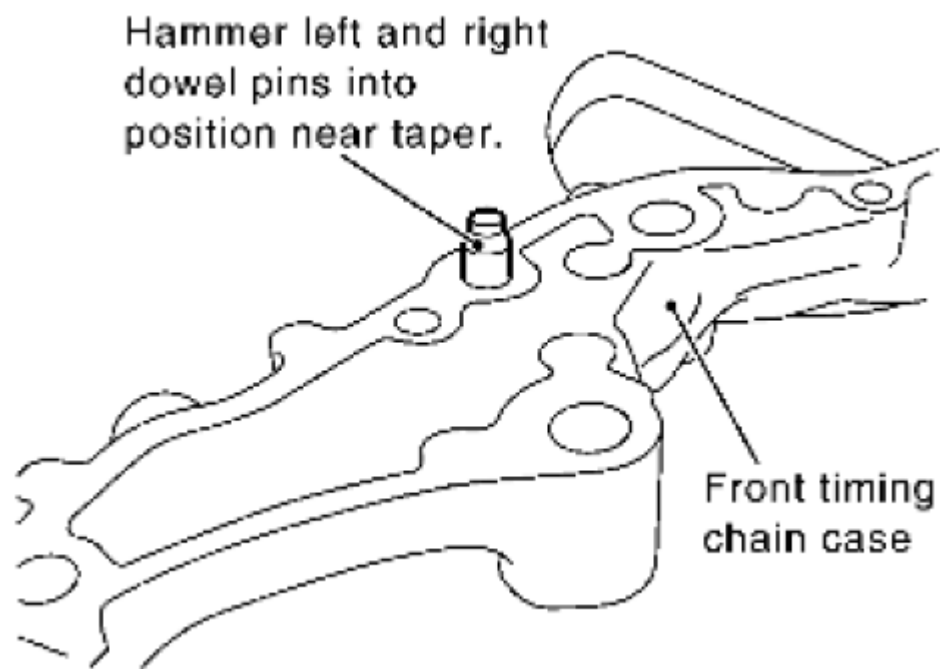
Identifying Hammer Dowel Pins Into Front Timing Chain Case
